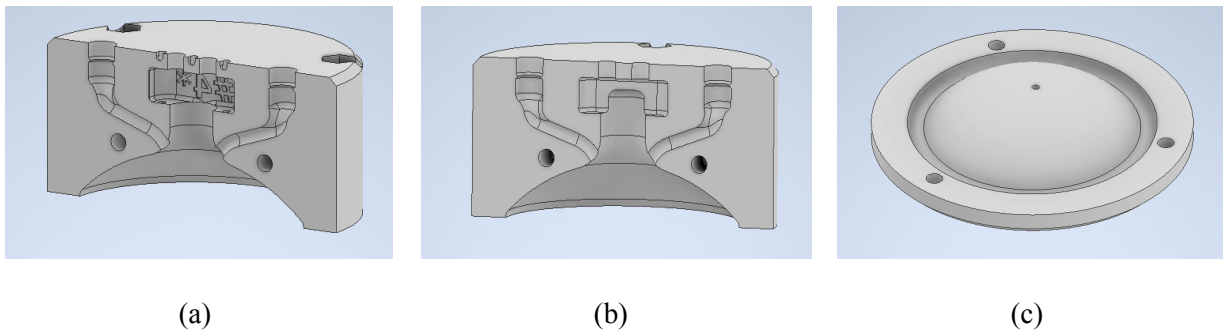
Sample CAD model for mold (corresponding to cup #4) split into part A (a), part B (b), and part C (c). Final CAD cup mold designs for each of the cups were divided into three separate pieces: (a) a left-side body part; (b) a right-side body part; (c) a bottom base. (a) Part A was made by making a revolve cut at the base of the model, and then making an extrude cut at the middle of the mold. (b) Part B was made by reversing the extrude cut for A. (c) Part C was made by deleting the extrude cut and reversing the revolve cut from part A. This was done for each provided base model so that each of the molds adhered to the different levels of key parameters assigned to the cups.
